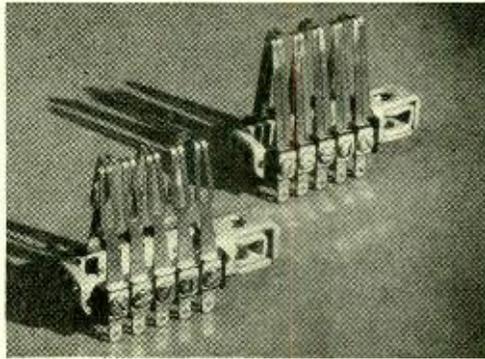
Bifurcated springs are used in an improved assembly (left). The springs are clamped by a screw and can be changed separately. Previously the entire pileup (right) had to be removed and reassembled; all the connections also had to be unsoldered and resoldered
